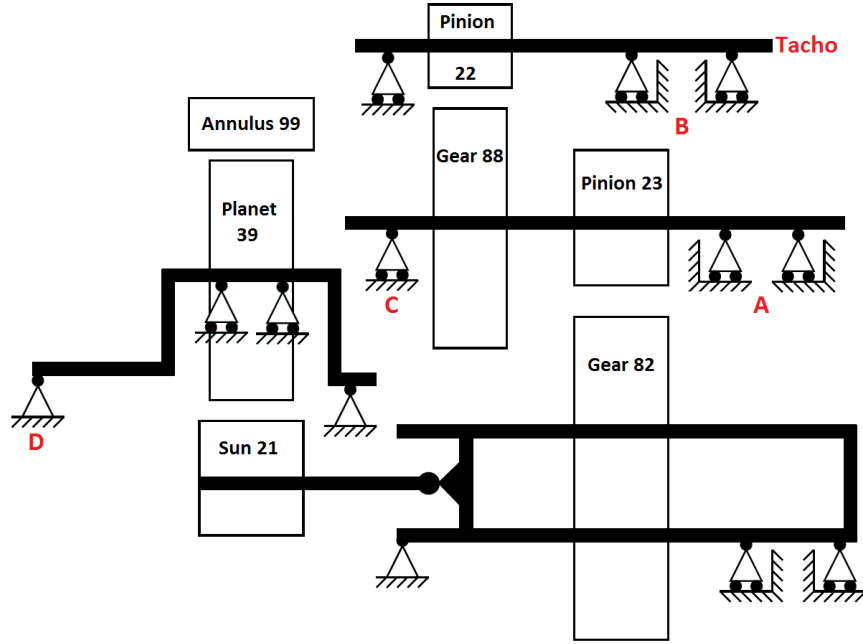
Schematic of wind turbine gear box with number of teeth and locations of defective bearings
